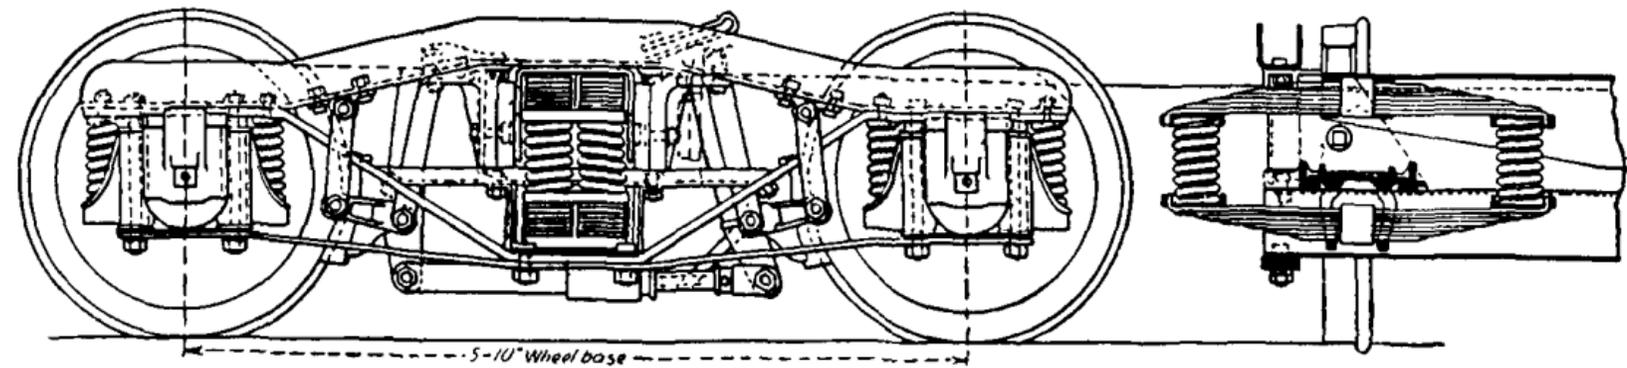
Modified arch bar type swivel truck with helical springs at journal boxes and combination half-elliptic and helical springs under bolster.
